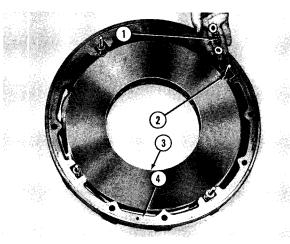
REMOVING SEPARATOR SPRINGS
